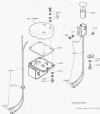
3D MODEL OF THE MECHANICAL ASSEMBLY
